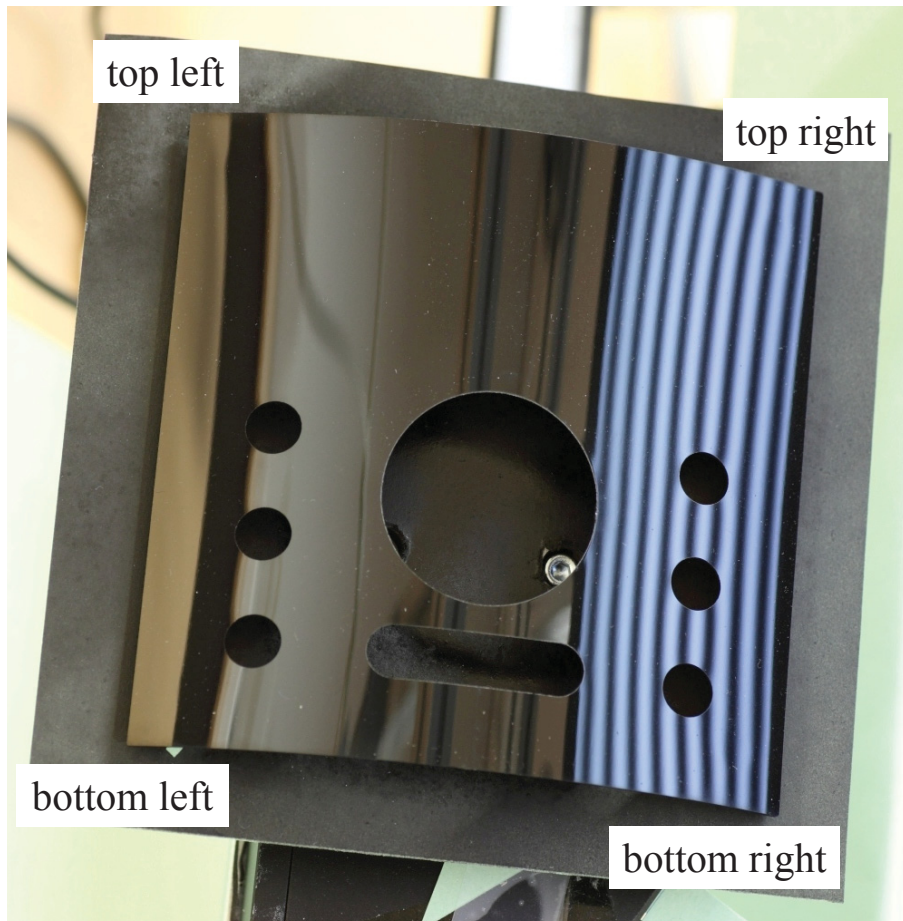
Front side of the injection molded part “Coffee Maker Front Panel” (courtesy of Wittmann Battenfeld GmbH) with dimensions of $100 \times 100 \text{ mm}^2$. The inspected sink marks are located in the corners of the part.
